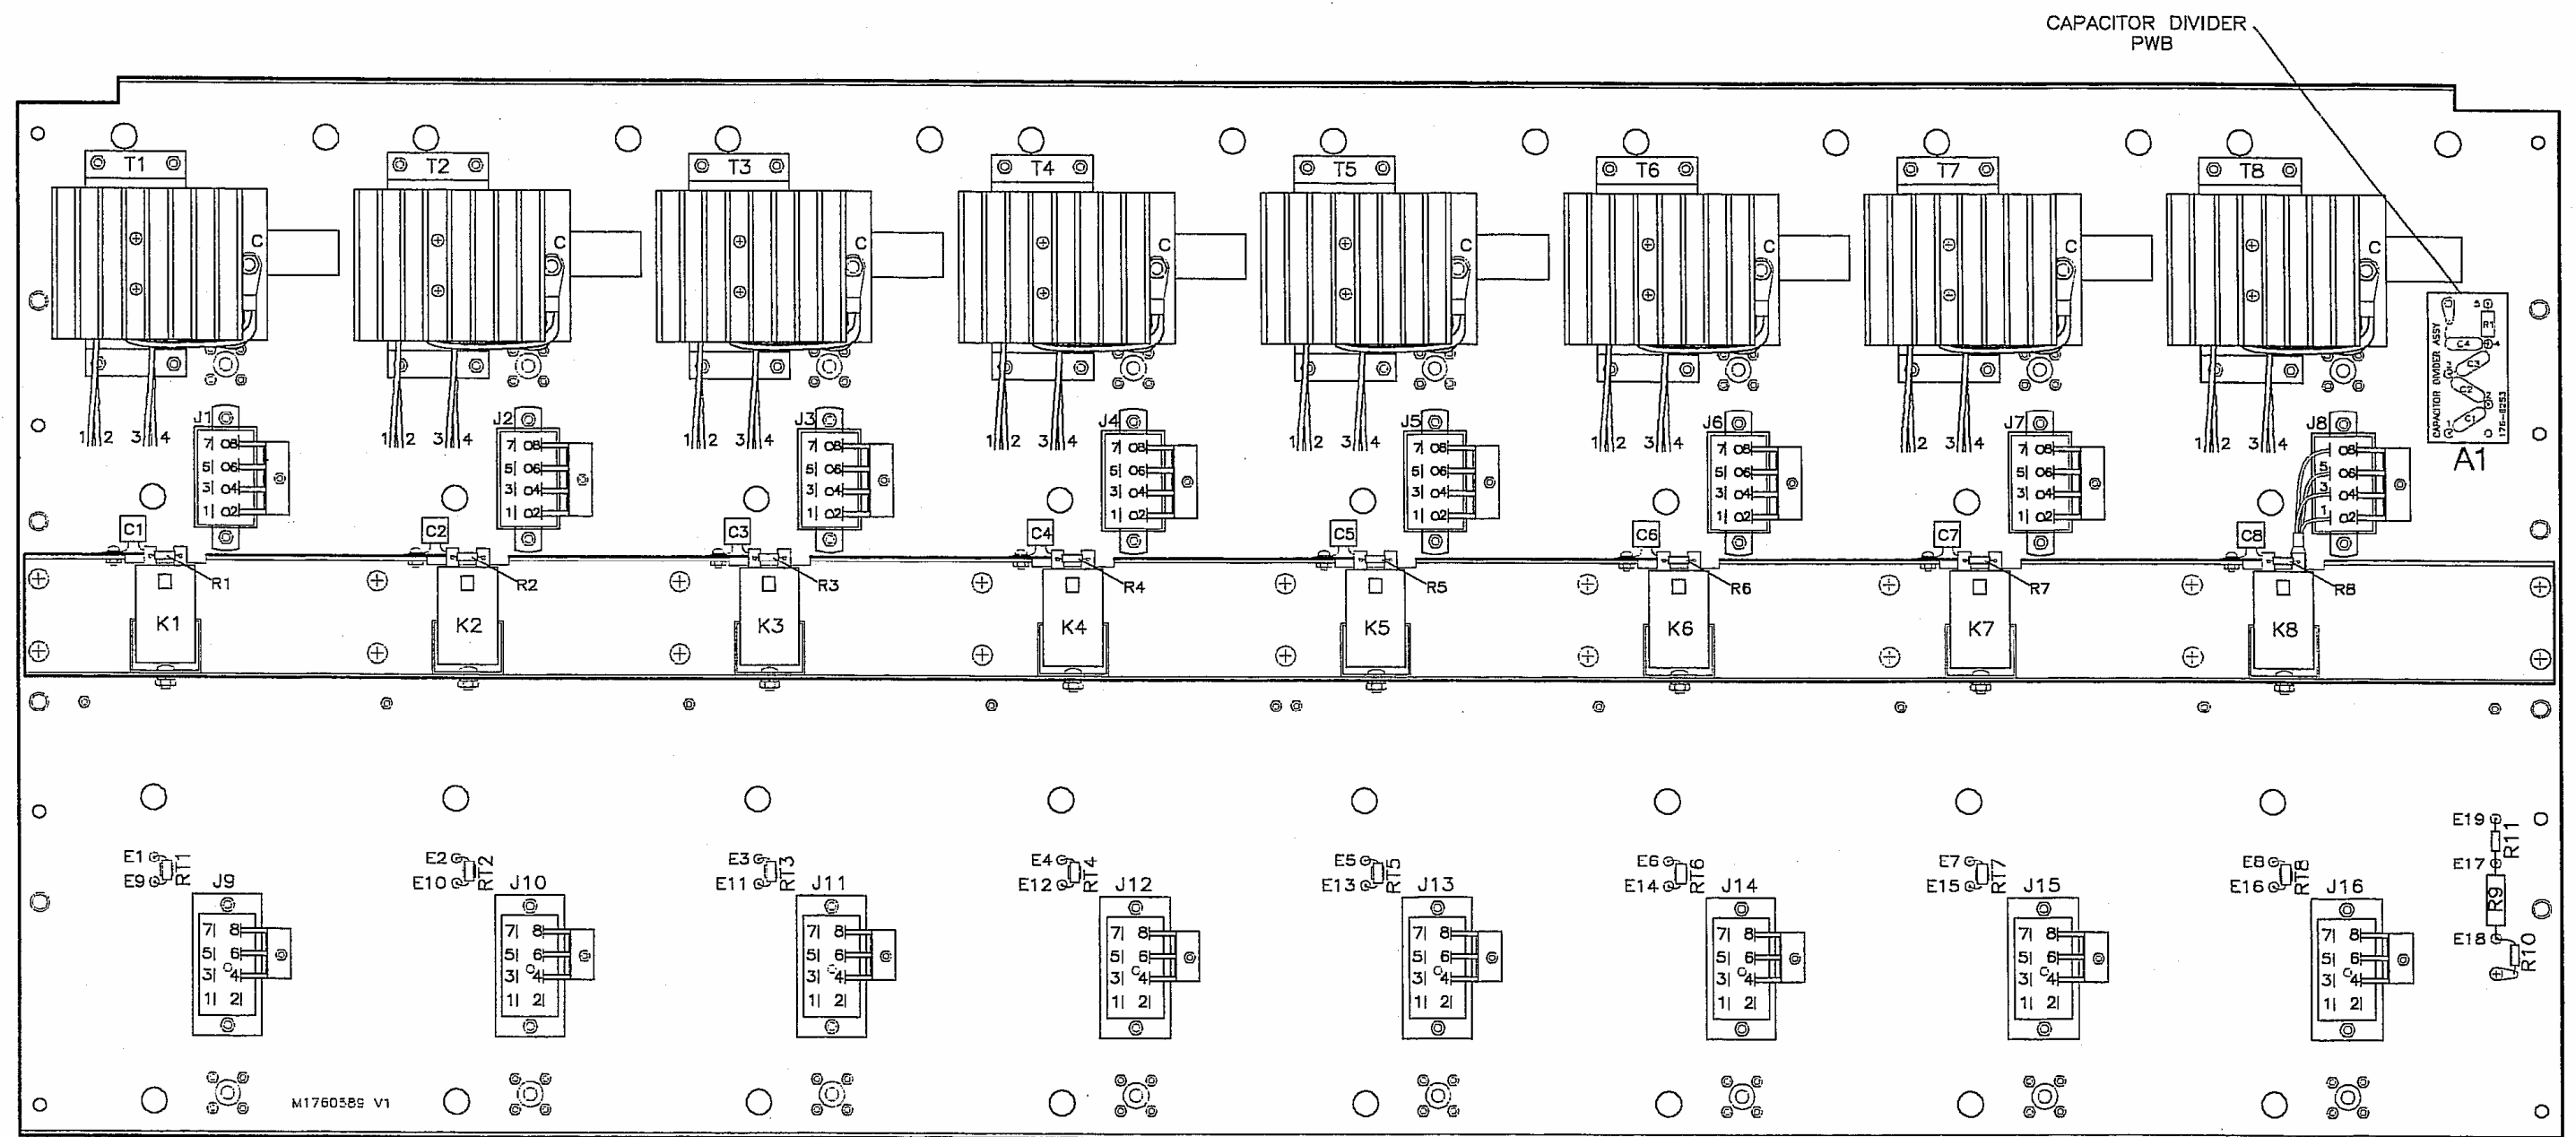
Assembly Detail - Back Plate Assemblies (P/N 176-8250-05 and 176-8250-07)
